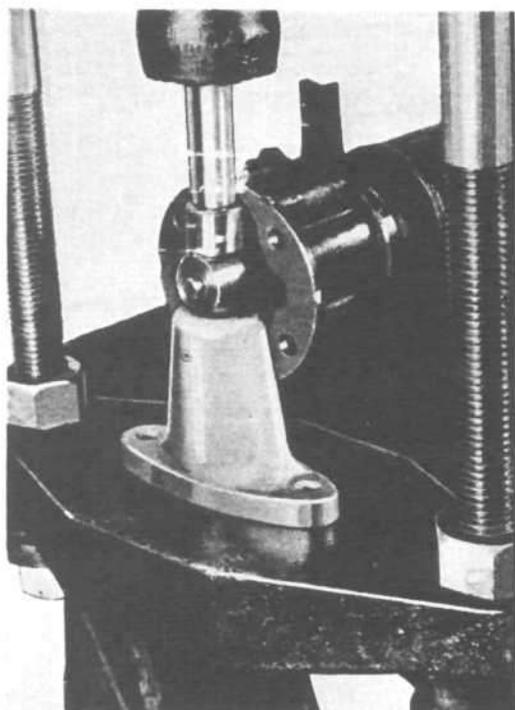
UNIVERSAL JOINT PIN REMOVER AND REPLACER
